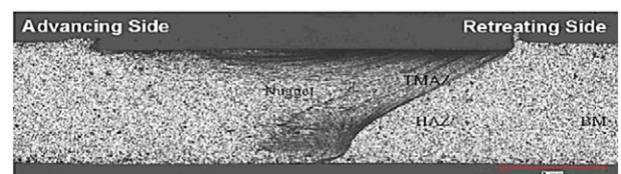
Partial appearance of an onion ring in a cross-section of an AA6063/B₄C/10.5p welded by FSW [38].
